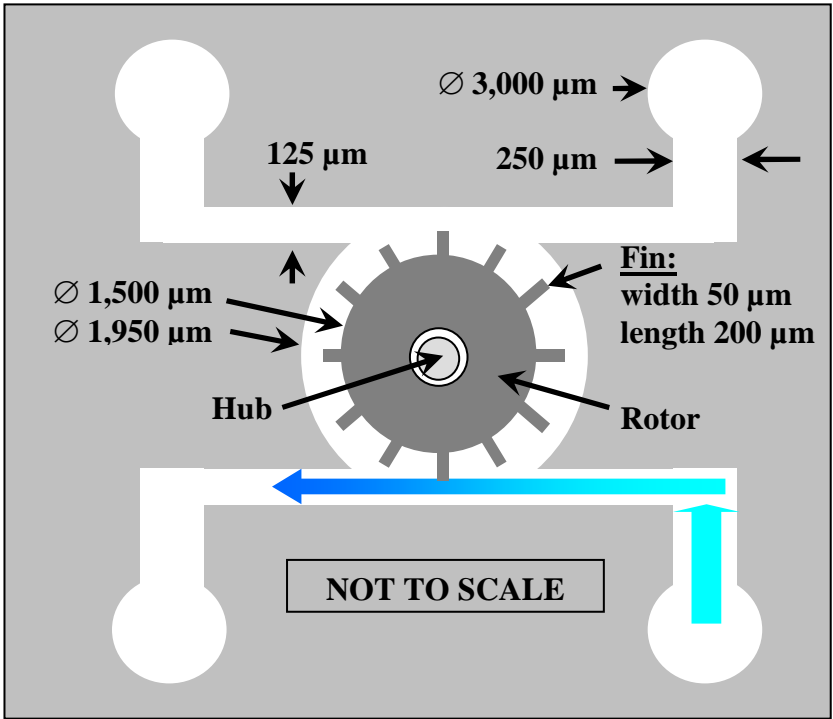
Microbearing assembly schematic depicts single channel nitrogen gas flow in order to rotate the rotor.
